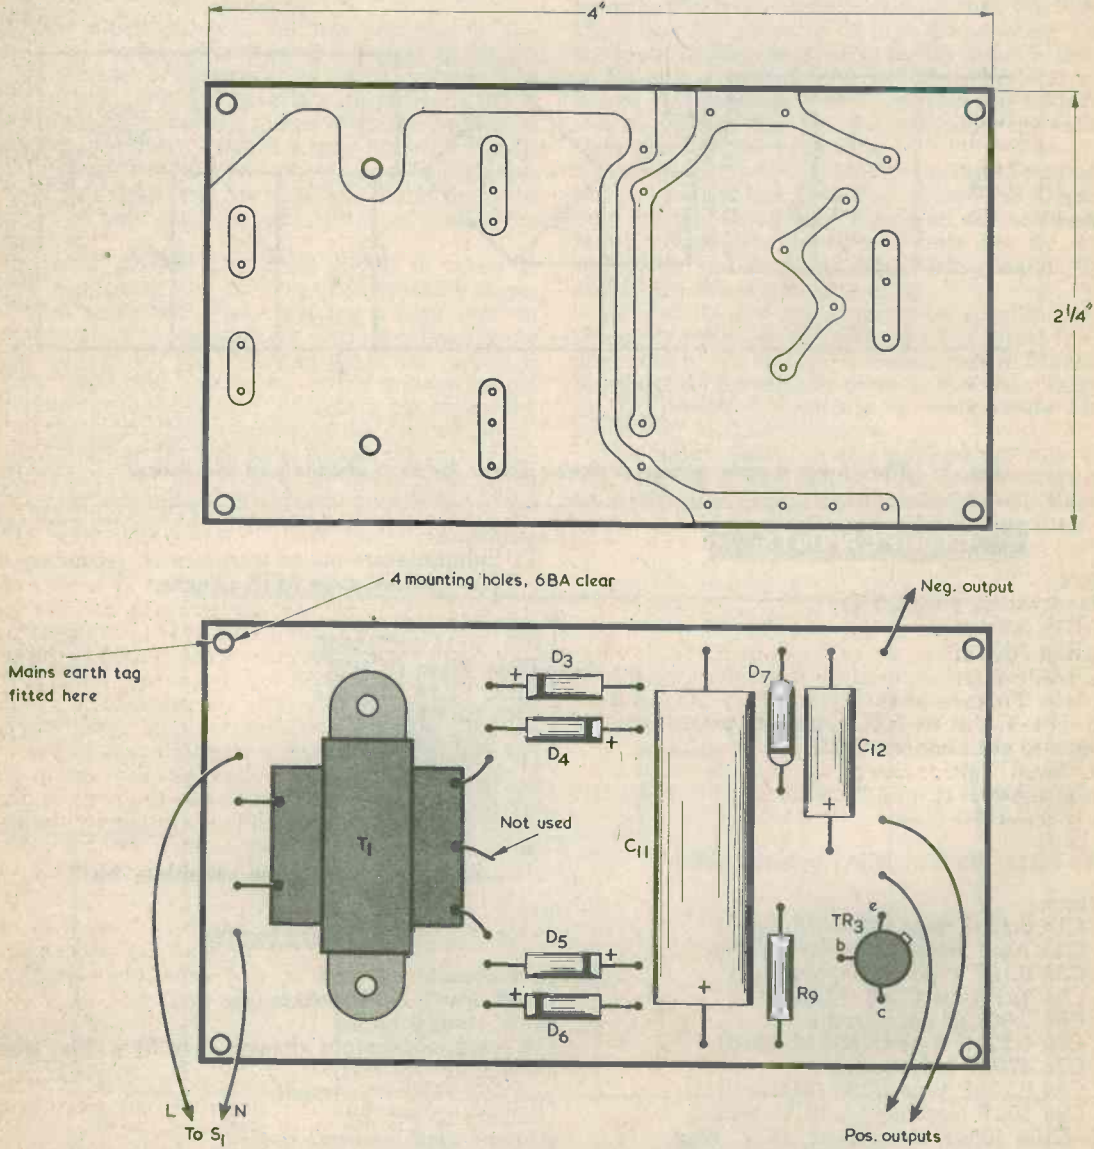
The copper and component sides of the power supply printed board. This is reproduced full size and the diagram may be traced
